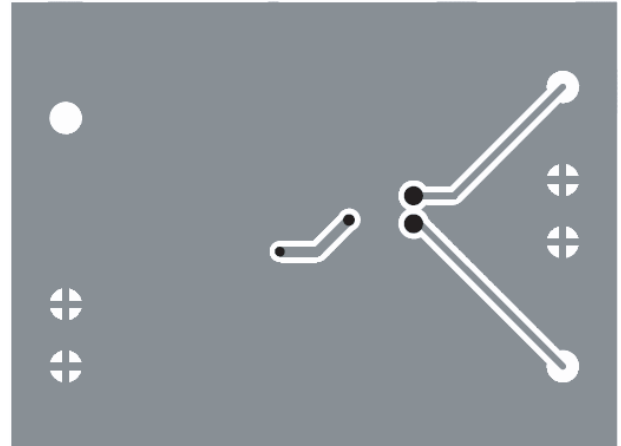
AAT2789 Evaluation Board Solder Side Layout.
